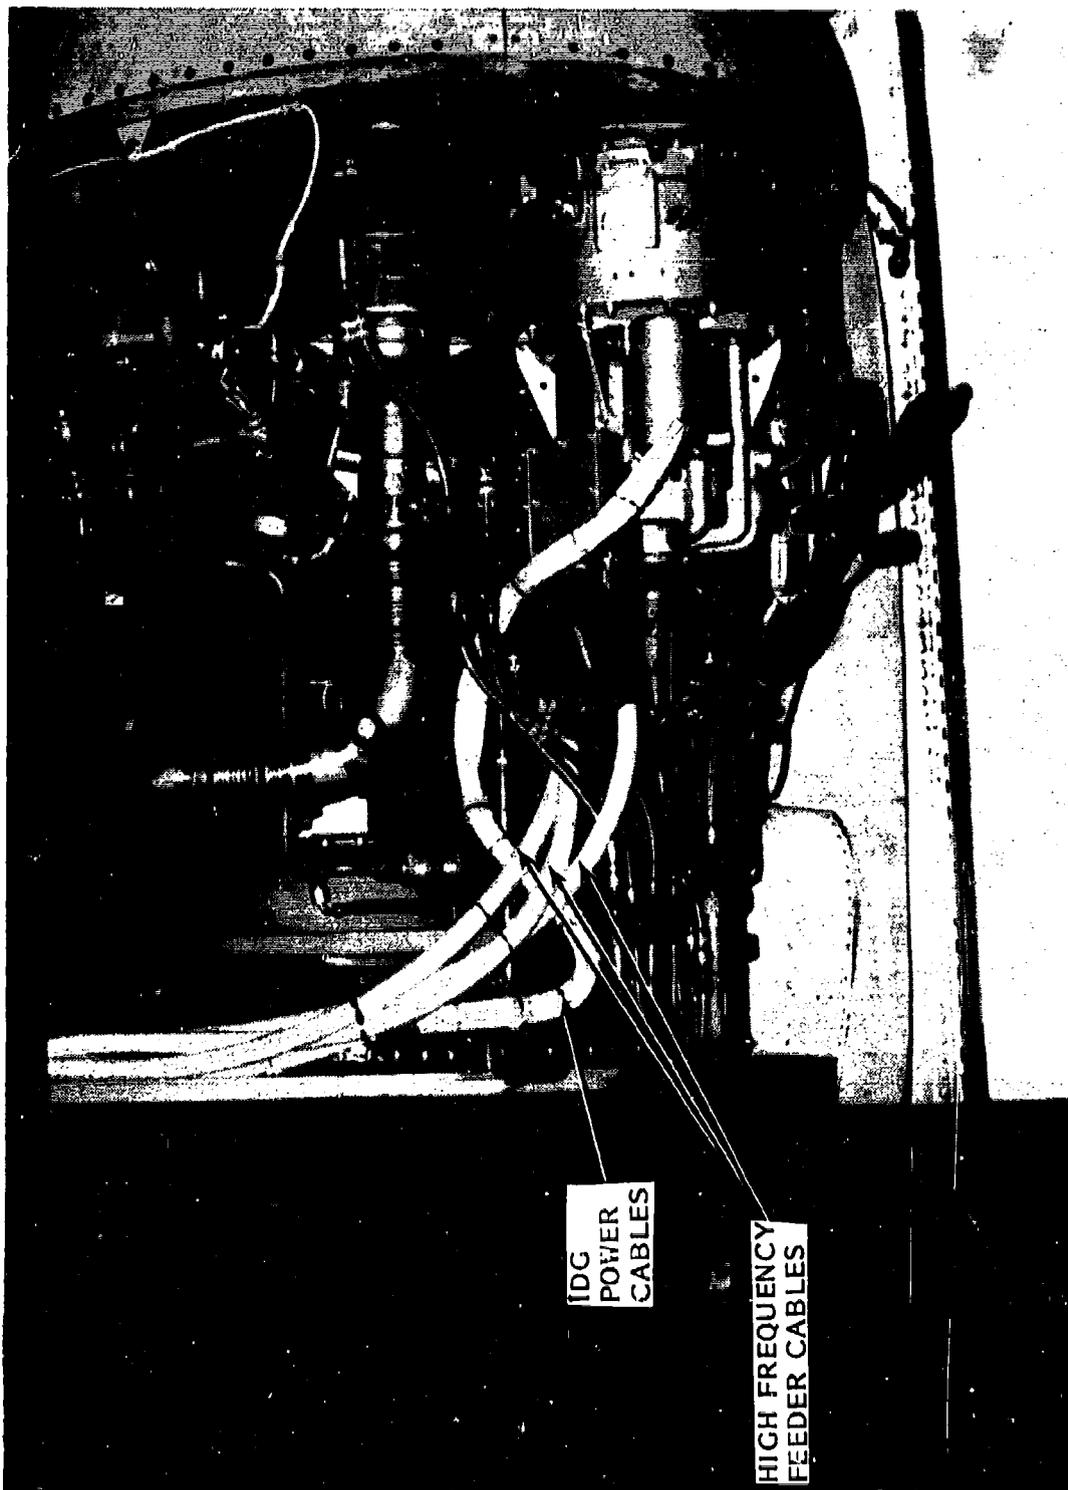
PM Generator/Gearbox Assembly Installed on TF-34-100 Engine
